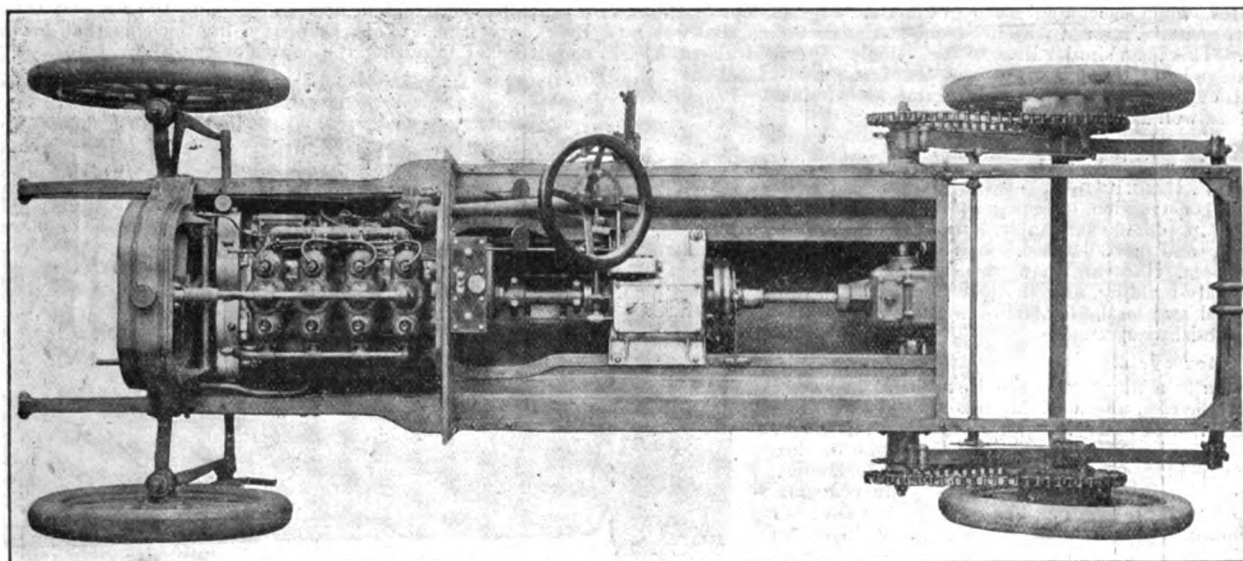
Plan of Chassis of Ader 16-20-h.p. Car.
